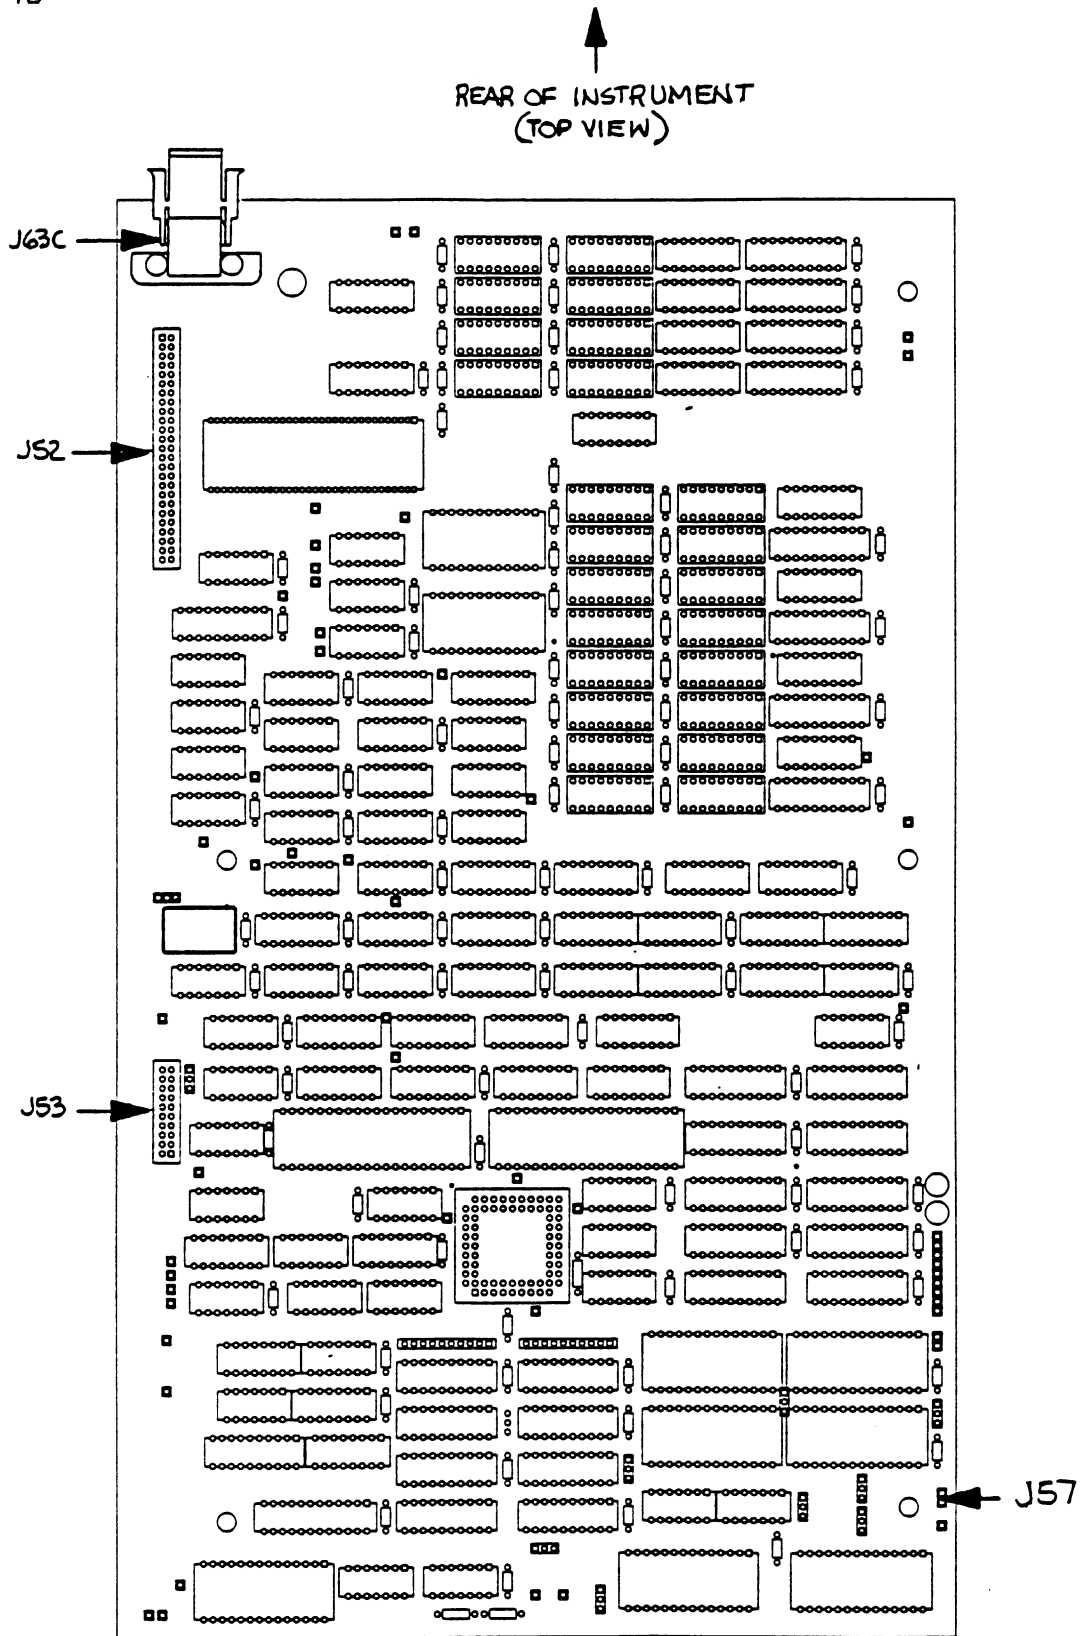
Connector locations for removal of the A7 Display Controller Board.
